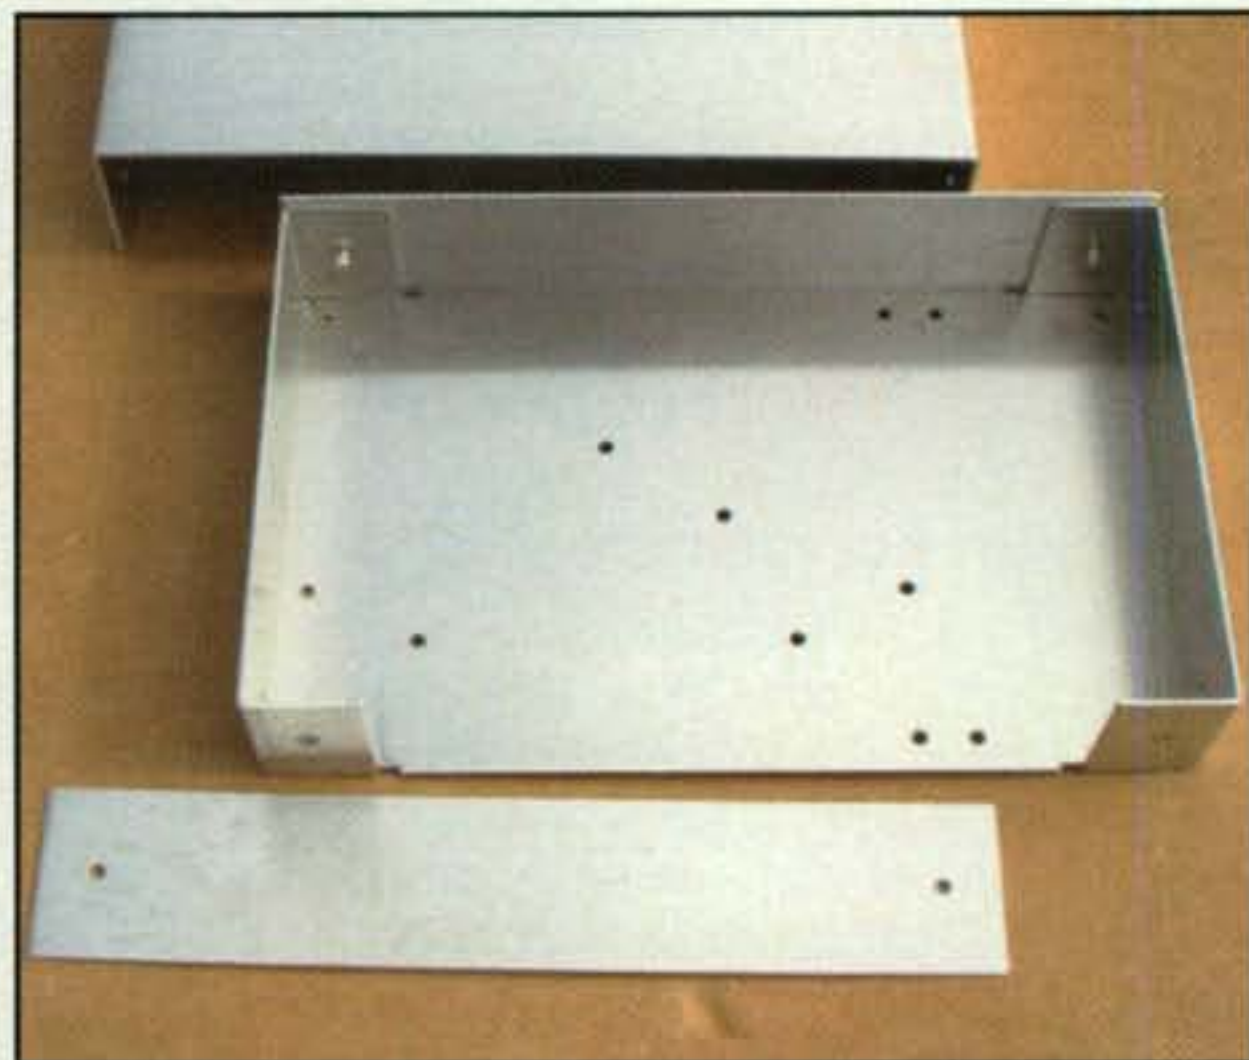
Photo A— The Case2004 Aluminum Prototyping Case is a fully formed and predrilled aluminum case offered by Alden McDuffie, Inc. It consists of four drilled and formed aluminum pieces: a folded chassis bottom, a U-shaped top, and two identical panels (front and back). (Photo courtesy Alden McDuffie, Inc.)
